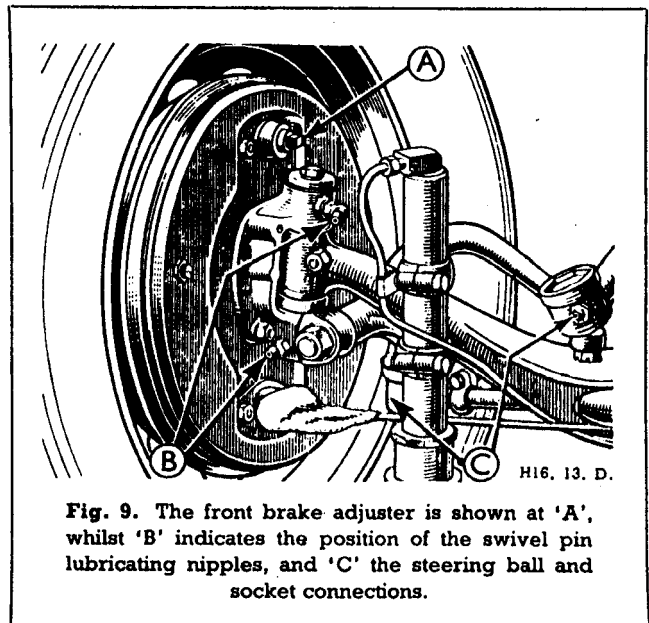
The front brake adjuster is shown at 'A', whilst 'B' indicates the position of the swivel pin lubricating nipples, and 'C' the steering ball and socket connections.
